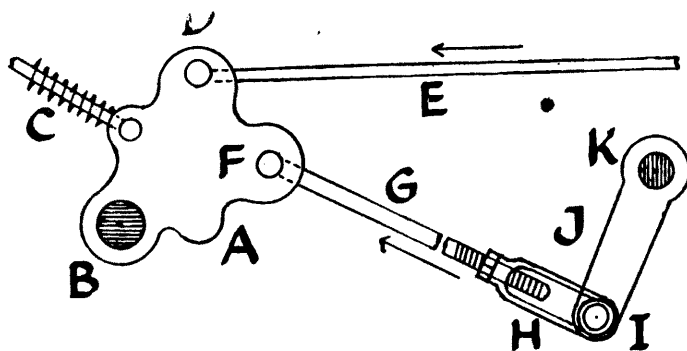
Shuttle Feeler and Weft Cutter Control.
